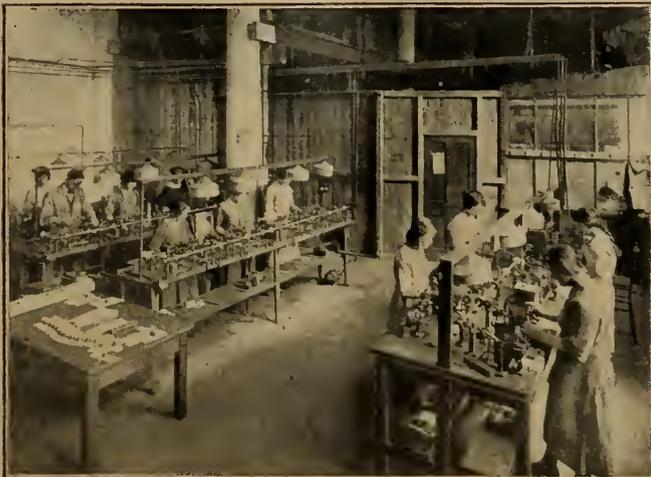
FINE-WIRE DRAWING MACHINES.
